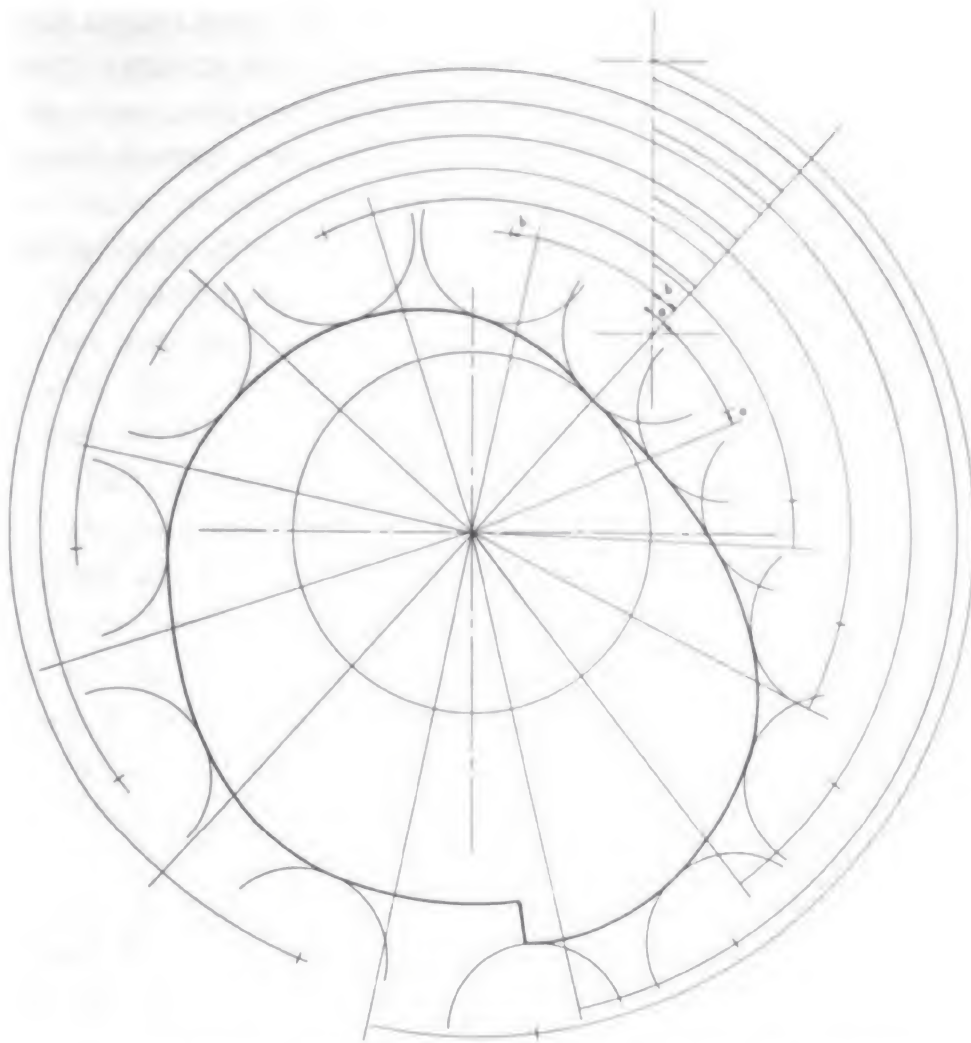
Final steps in drawing the layout of a simple plate cam.
